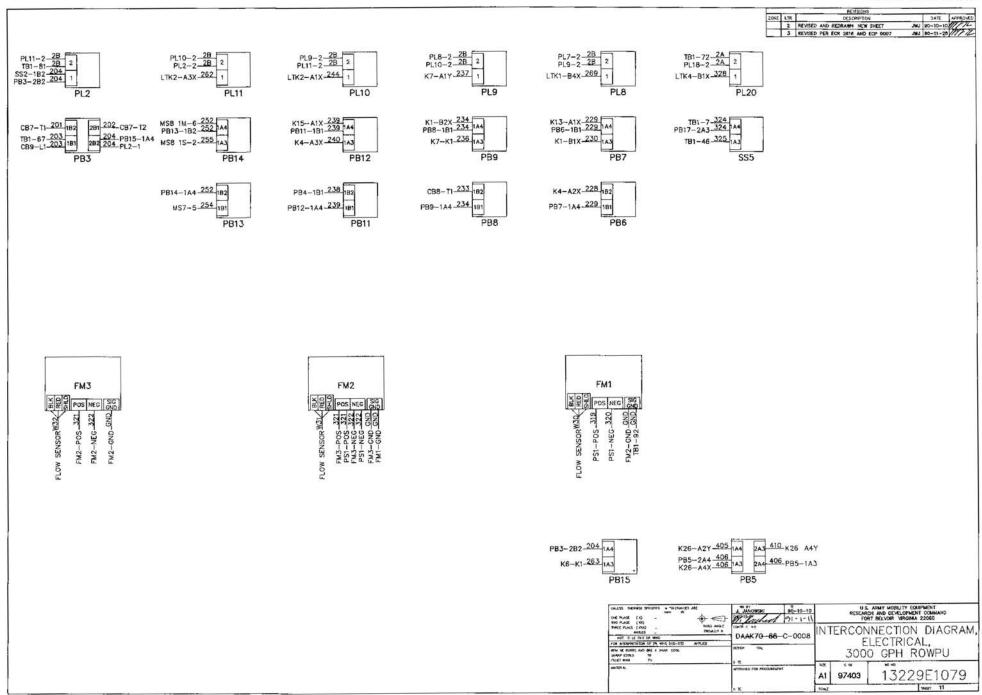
(Sheet 11 of 16) FP-43/(FP-44 blank)
